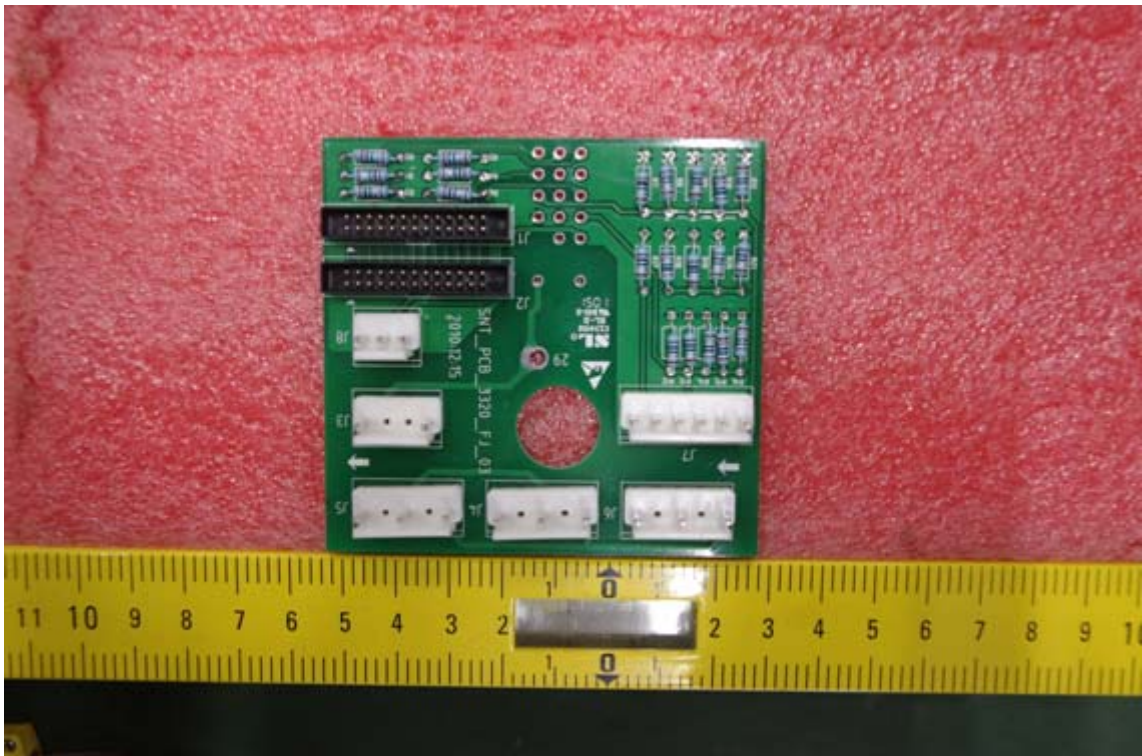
Board SNT\_PCB\_3320\_FJ, component side view
